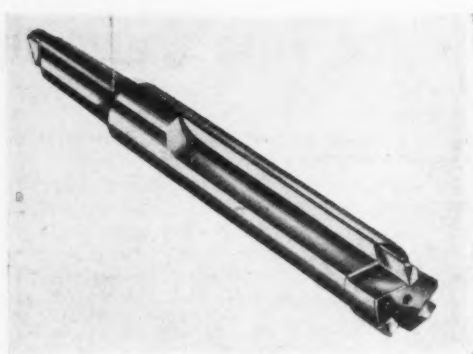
The Birmingham Tool & Gauge Gun Reamer
